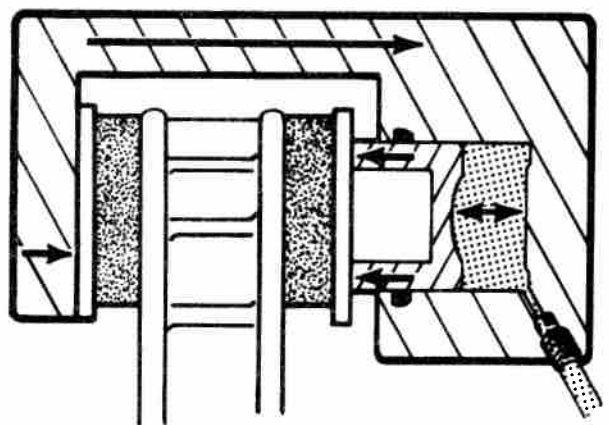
Cross-Section of Caliper Cylinder and Piston
